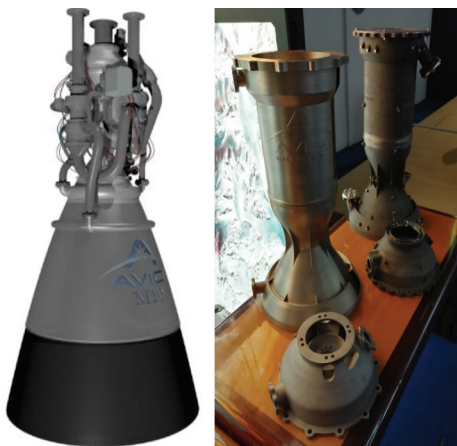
M10 engine layout and thrust chamber assembly technological models[22].
